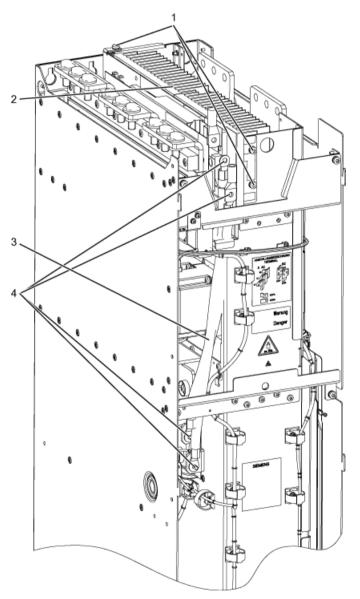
Installing the Braking Module in a Basic Line Module, frame size GB, GD
